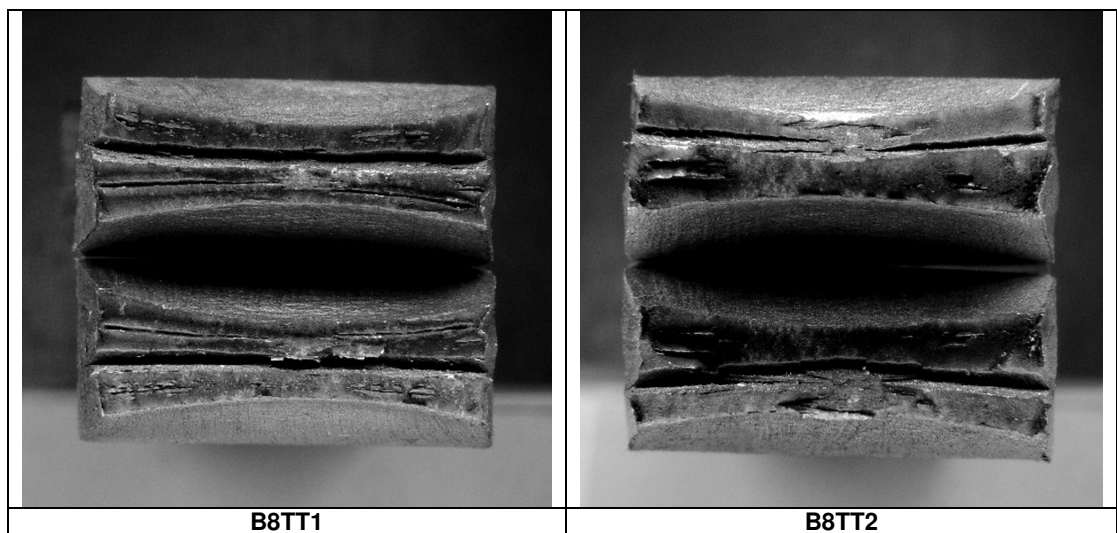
Fractographs of B8TT1 and B8TT2 specimens.
